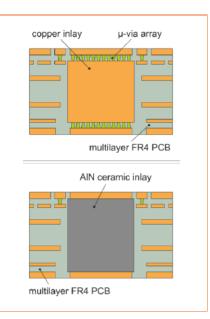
Multilayer PCB technologies with copper or aluminum nitride inlays.
